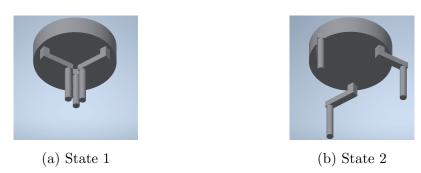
Chuck-type robotic hand with three rotational parallel stick fingers
